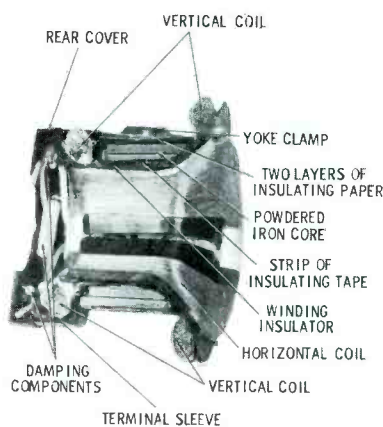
Cross-sectional view of a typical 90° yoke showing its complex makeup.
